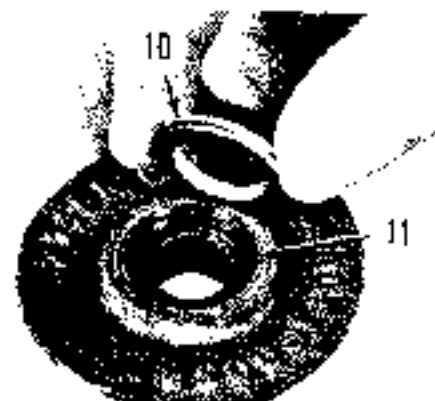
Install the ceramic collar (10) into rubber retainer (11) with the three holes in collar toward the impeller.
